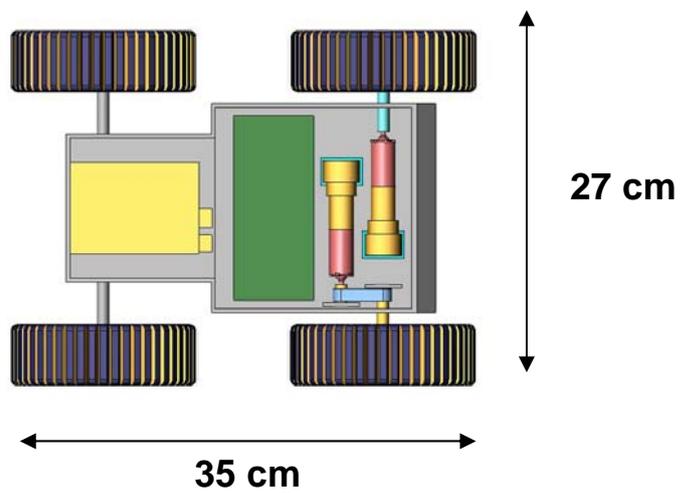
Rear Axle is Connected to a Caster Part
